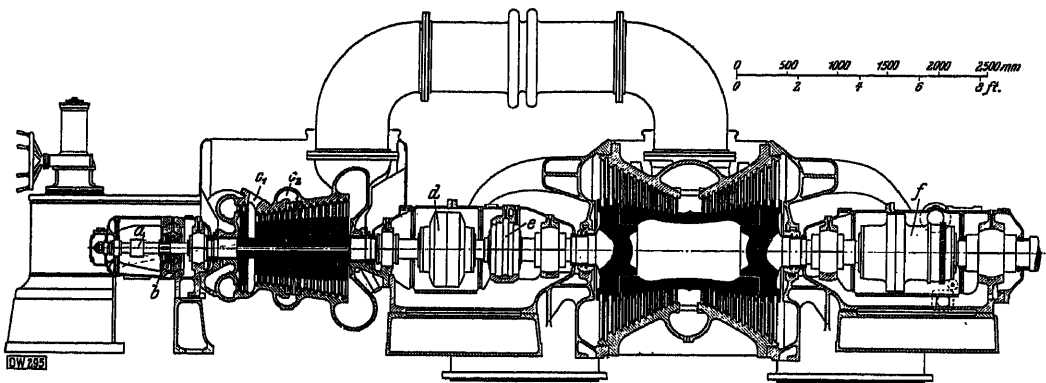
Erste Brünner*, 30,000 kw., 3000 R.P.M., two-casing high-pressure turbine
